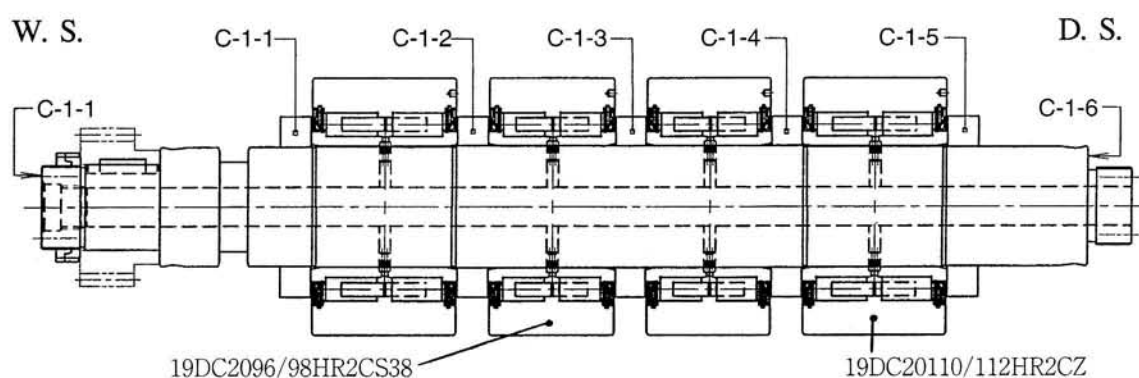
Construction of lower side large-diameter BUR assembly
